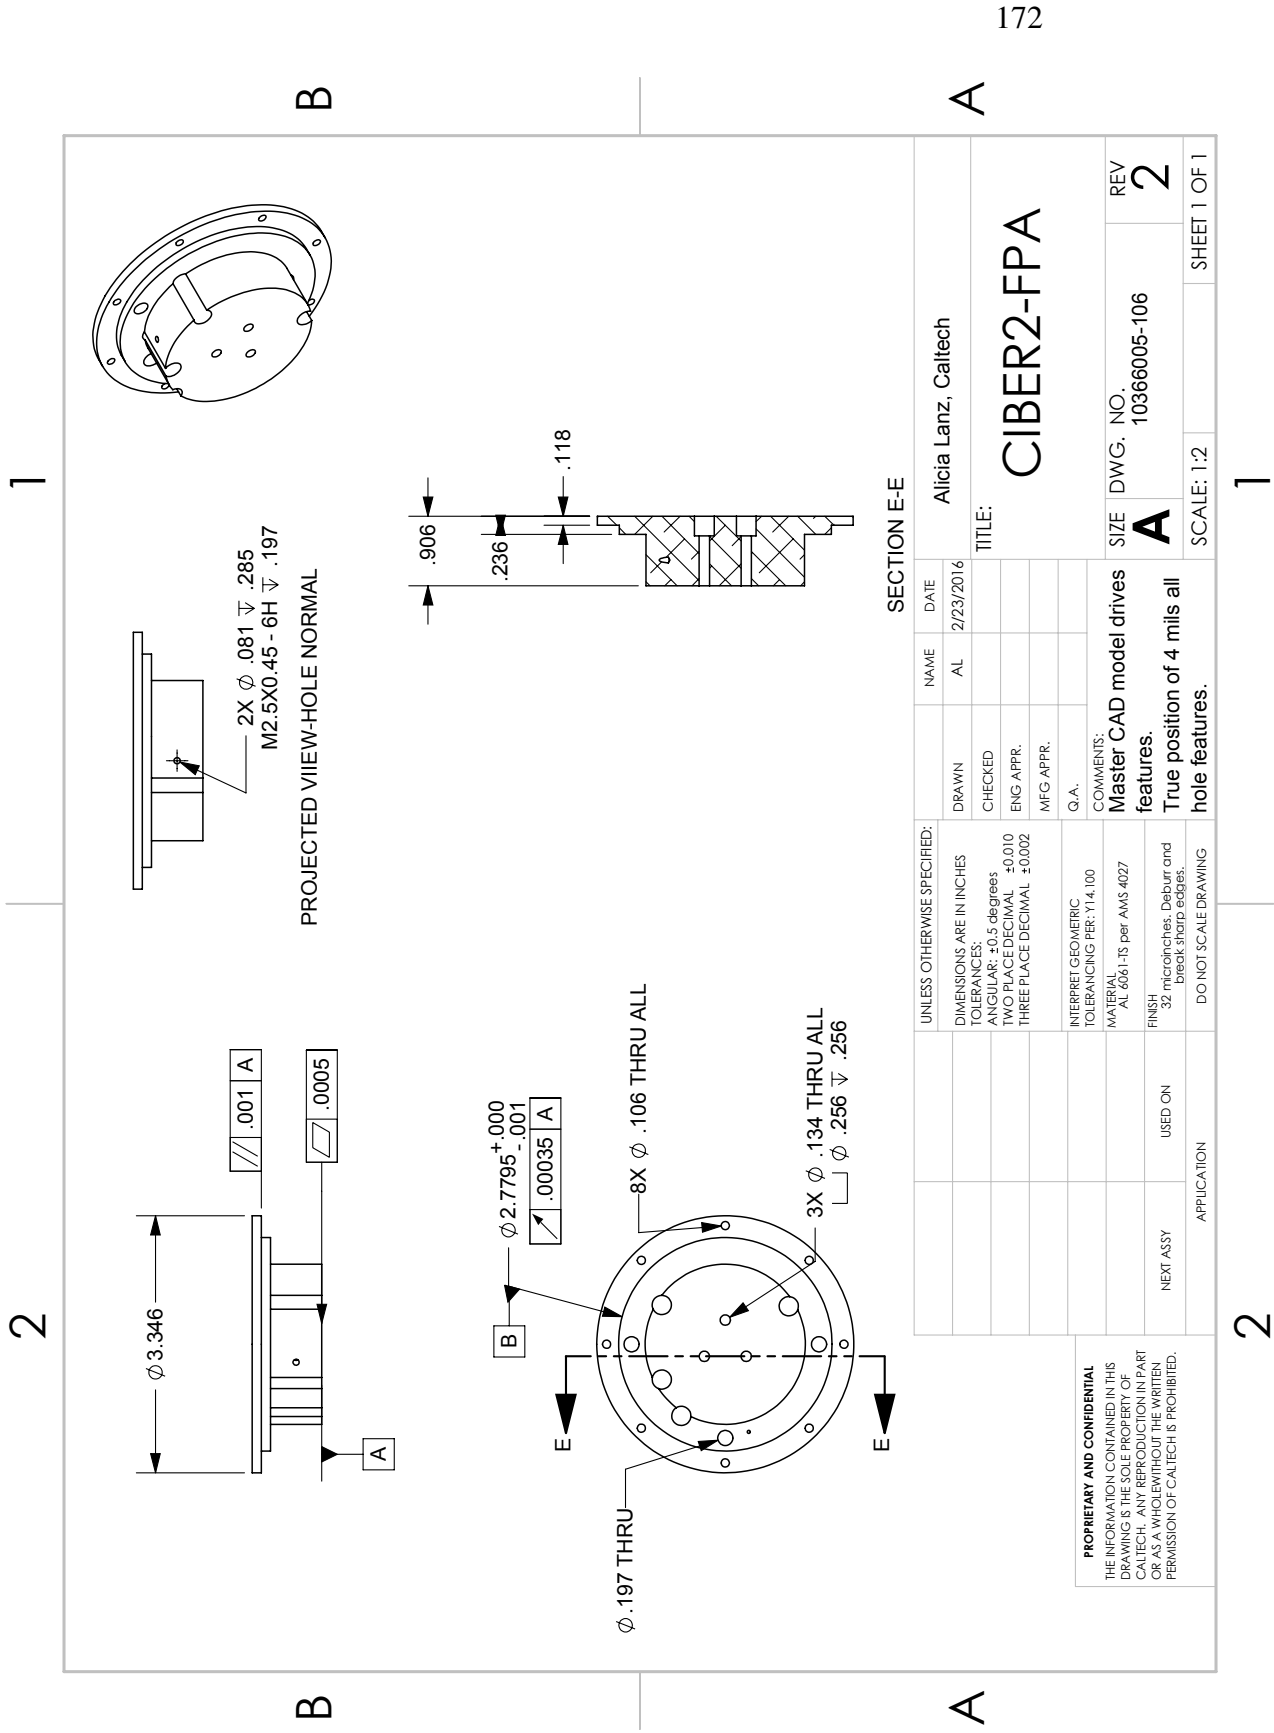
Mechanical drawing for flight version of the CIBER-2 focal plane assembly base.
